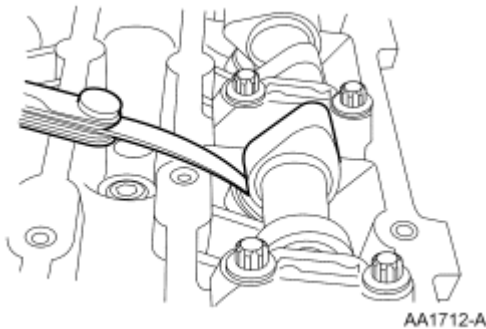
Measuring Each Valve's Clearance Using A Feeler Gauge
